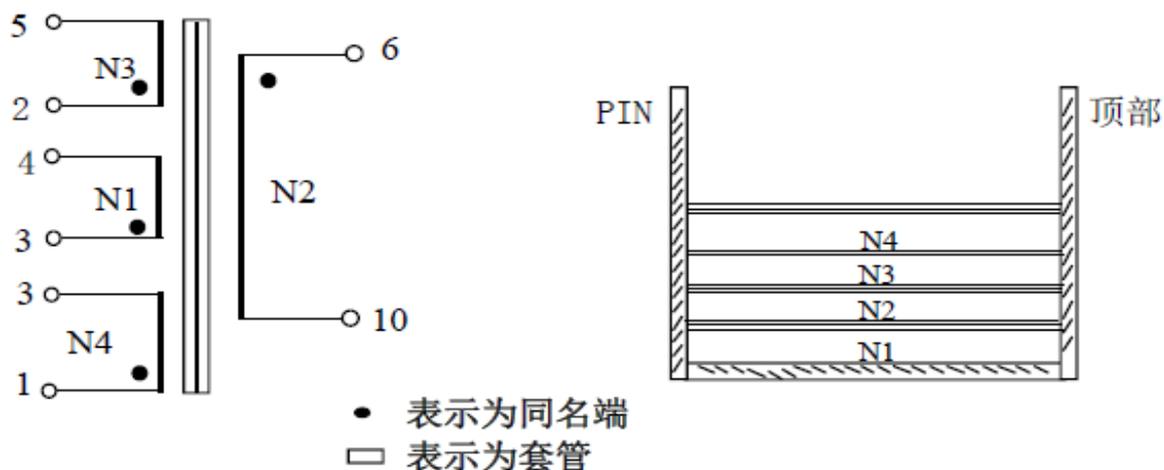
Drawing of Transformer 2 model LY6018-24V1.25A
